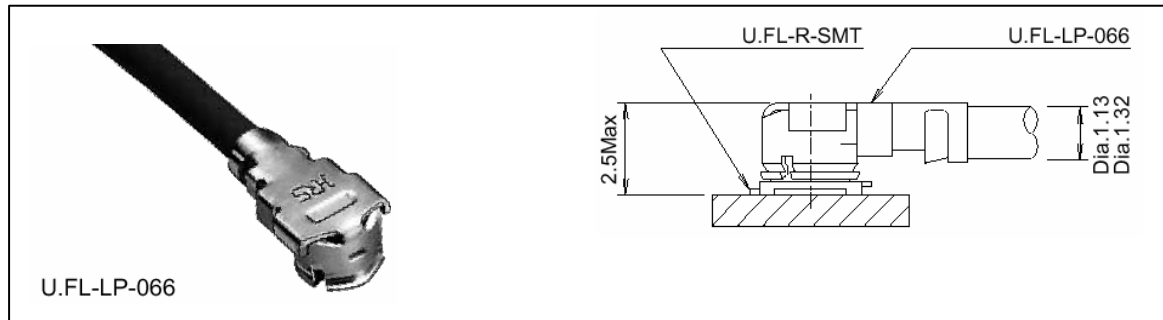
U.FL-R-SMT connector with U.FL-LP-066 plug
